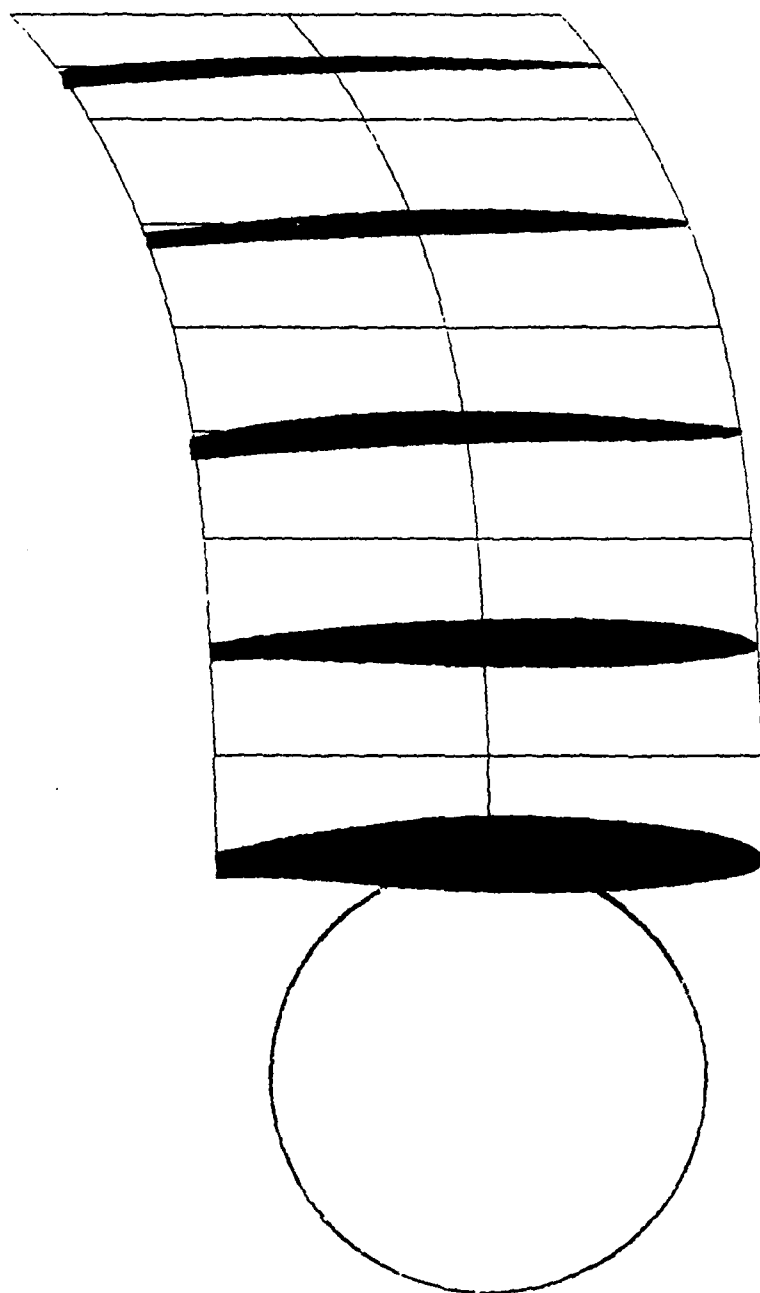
EXPANDED PROPELLER VIEW SHOWING TYPICAL
